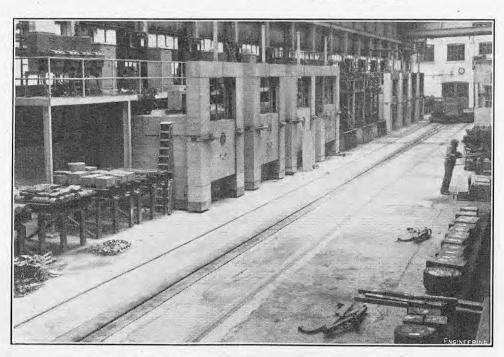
Heat-Treatment Furnaces and Quenching Tanks.
